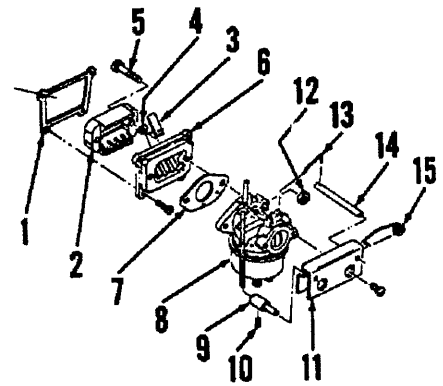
Exploded view of the reed valve used on AV750 models. Carburetor and reed valve must be removed and installed as a unit.
